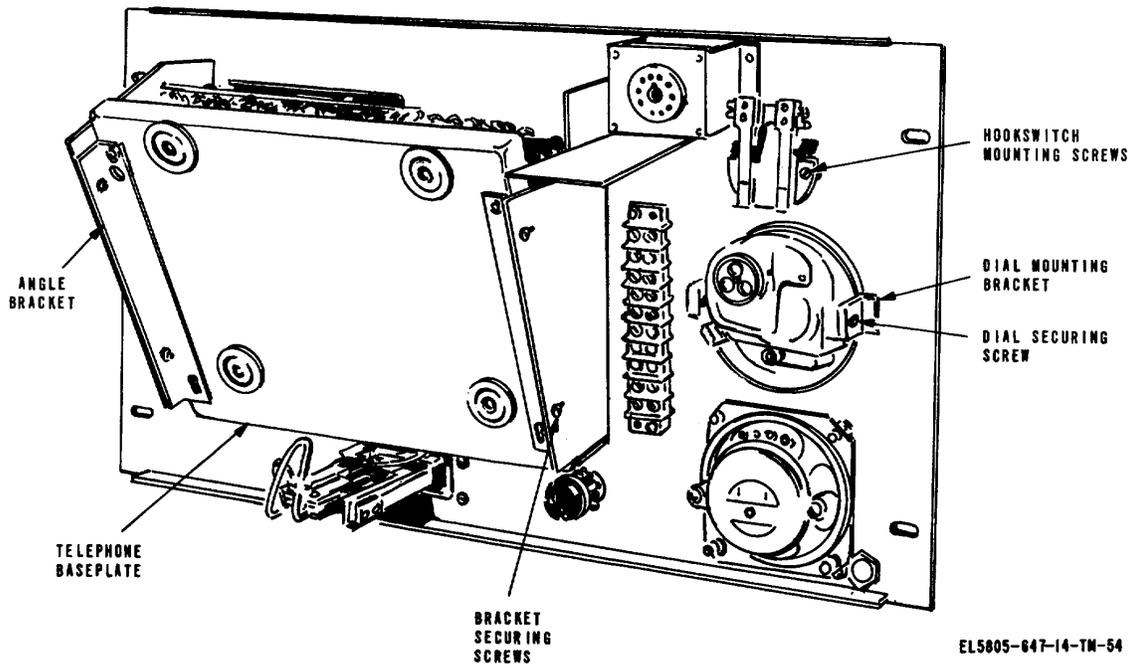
Rack mounted call director, frame and parts location (rear view).
